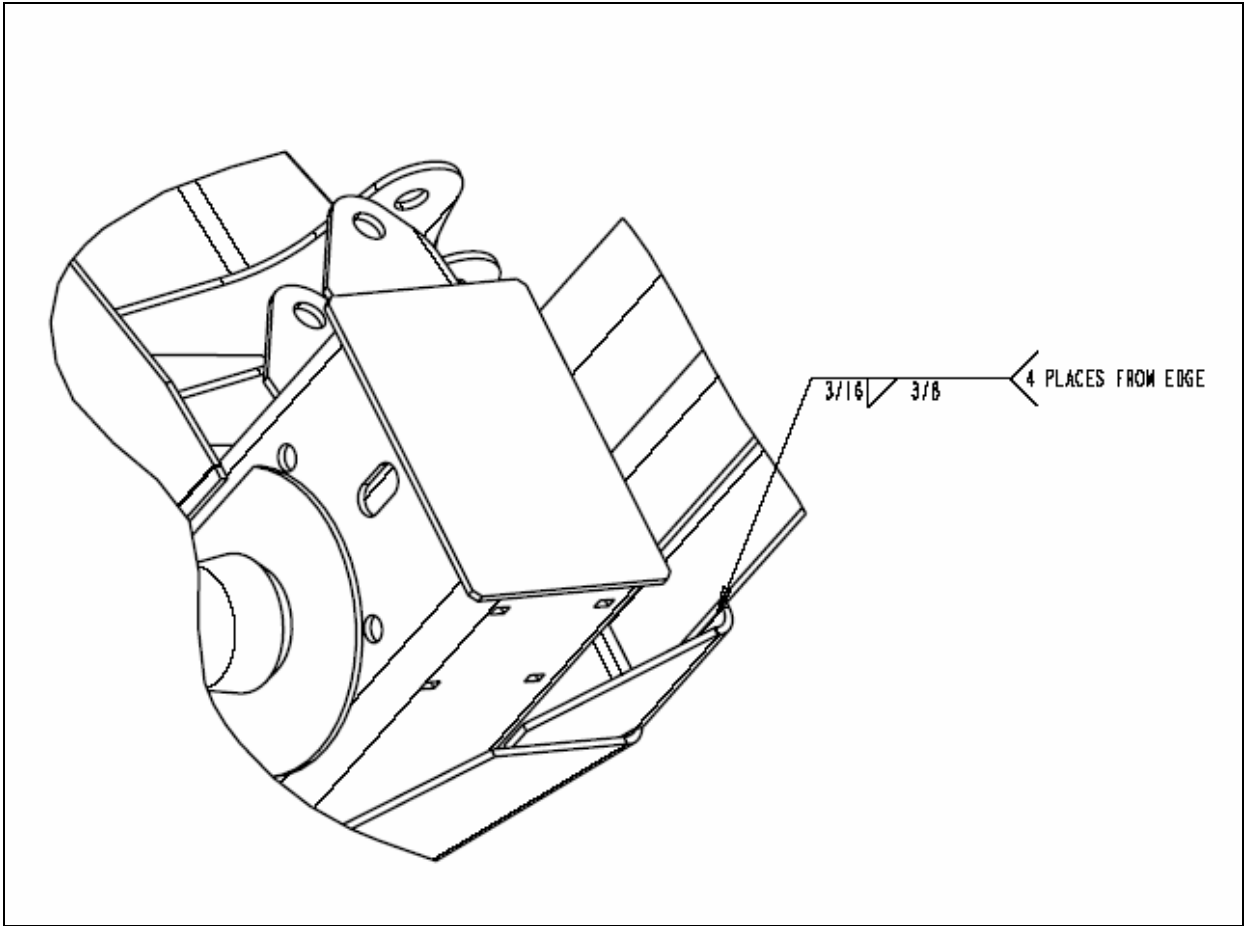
Weld channel edge to housing, 3/8 inch long weld from edge of housing
